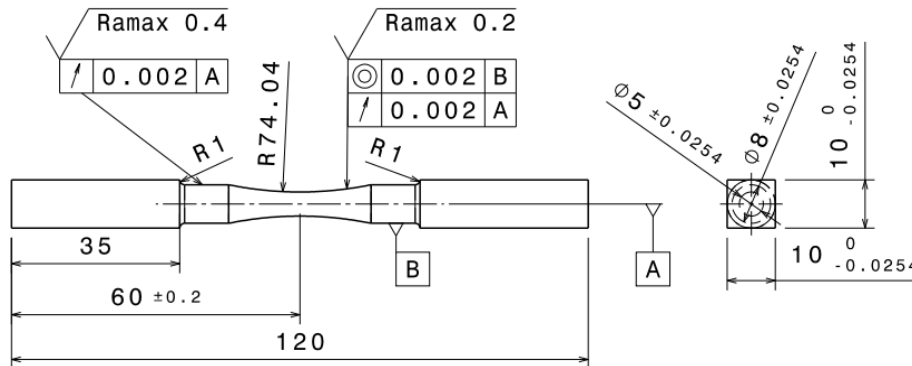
Torsion fatigue test specimen geometry (dimension in mm)
